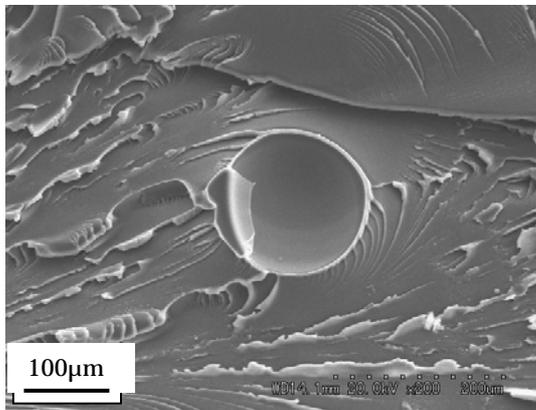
Air bubble at the welding interface which scale-up from Fig. 9(b)
